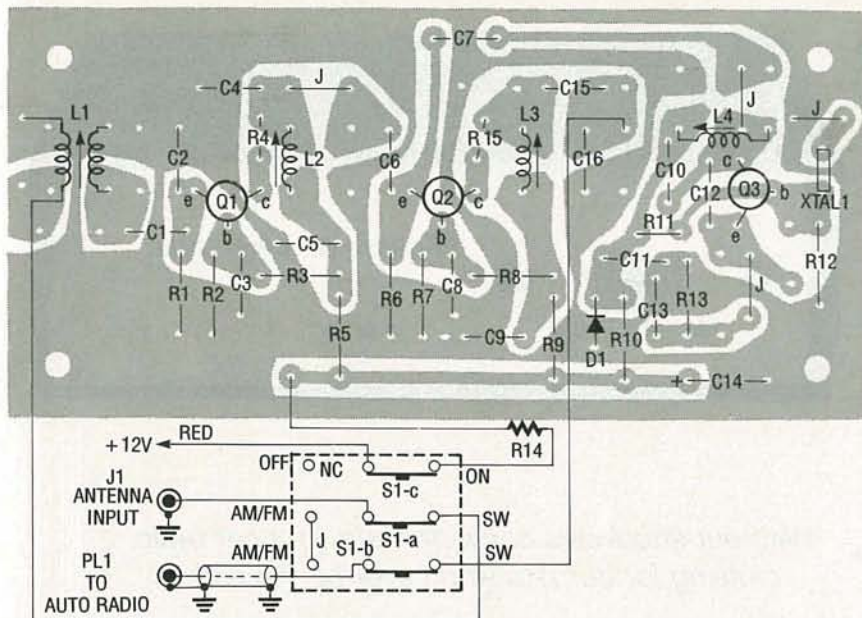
PARTS PLACEMENT IS STRAIGHTFORWARD. The copper pads are extra wide to accommodate coil forms of different sizes; drill an extra hole wherever your coils fit best.
